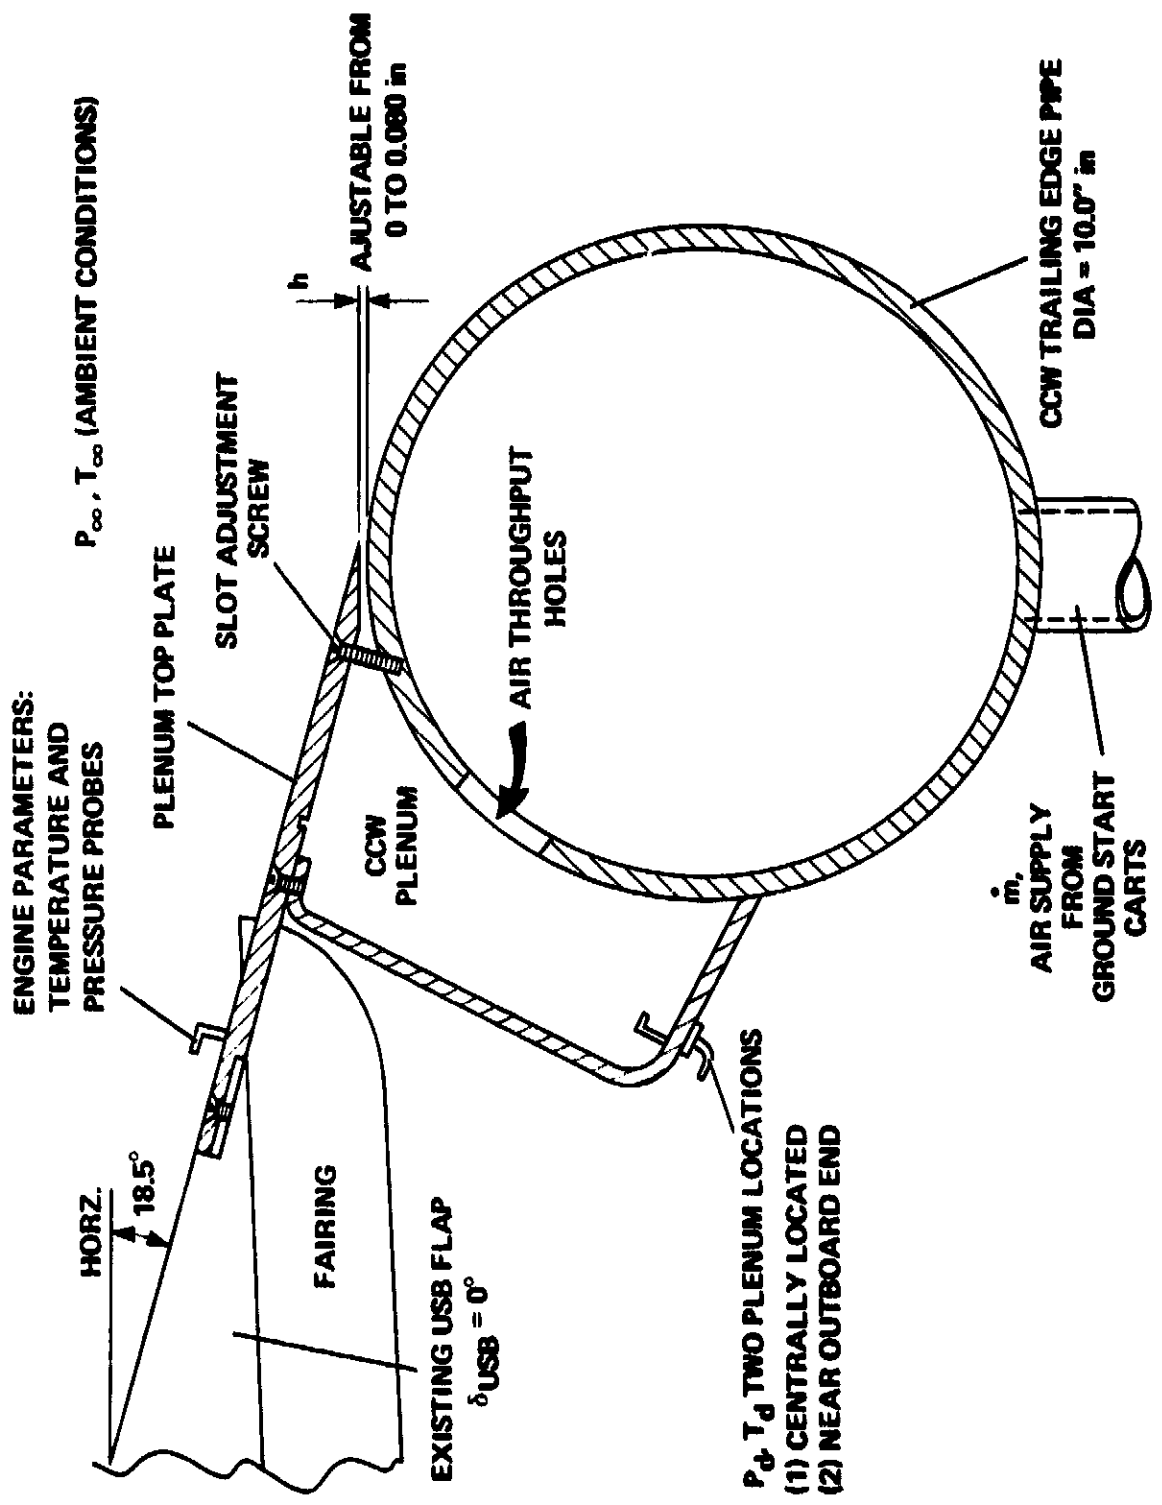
Detail drawing of circulation control wing (CCW) trailing edge.
